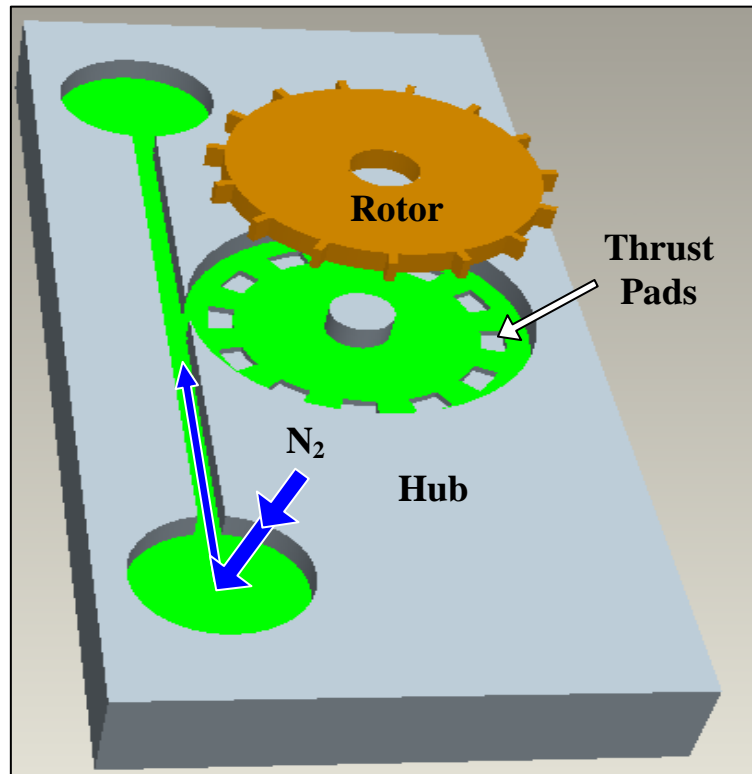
Exploded view of Phase 2 microbearing design depicts hydrodynamic sectorial, step thrust bearing pads.
